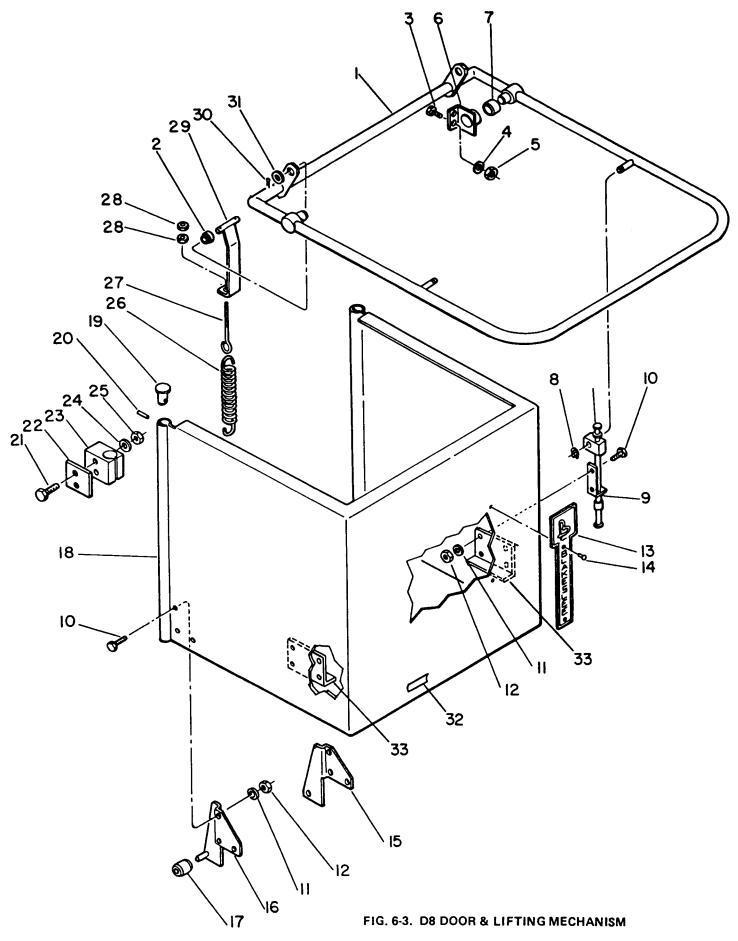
D-8 DOOR & LIFTING MECHANISM
